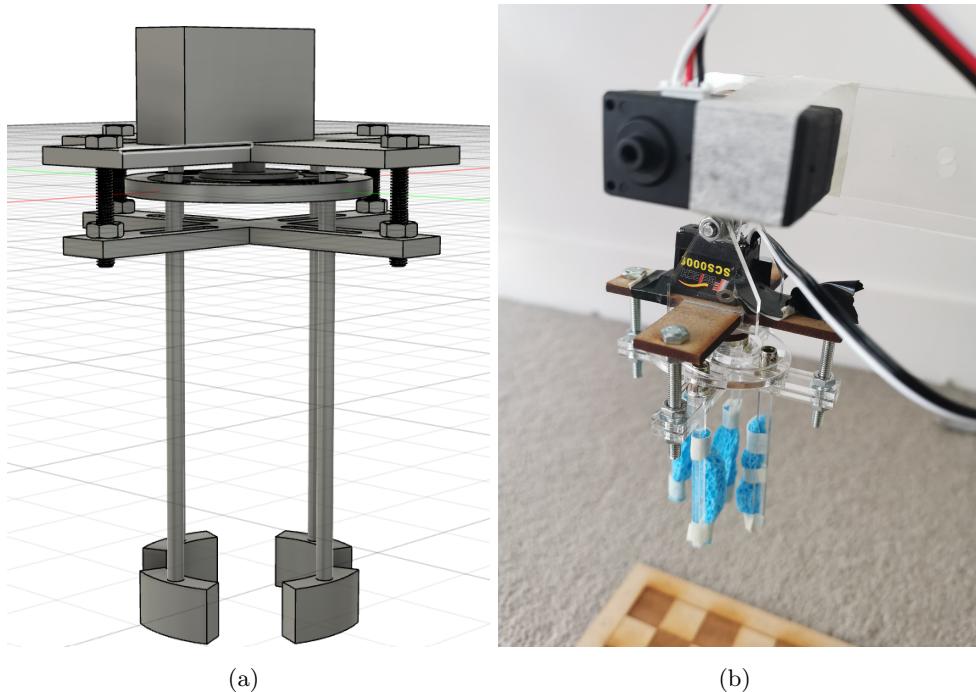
(a) Prototype Gripper Ideation in CAD (b) Final product of manufactured Gripper
